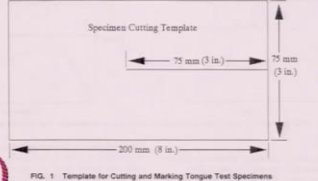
Template for Cutting and Marking Tongue Test Specimens
